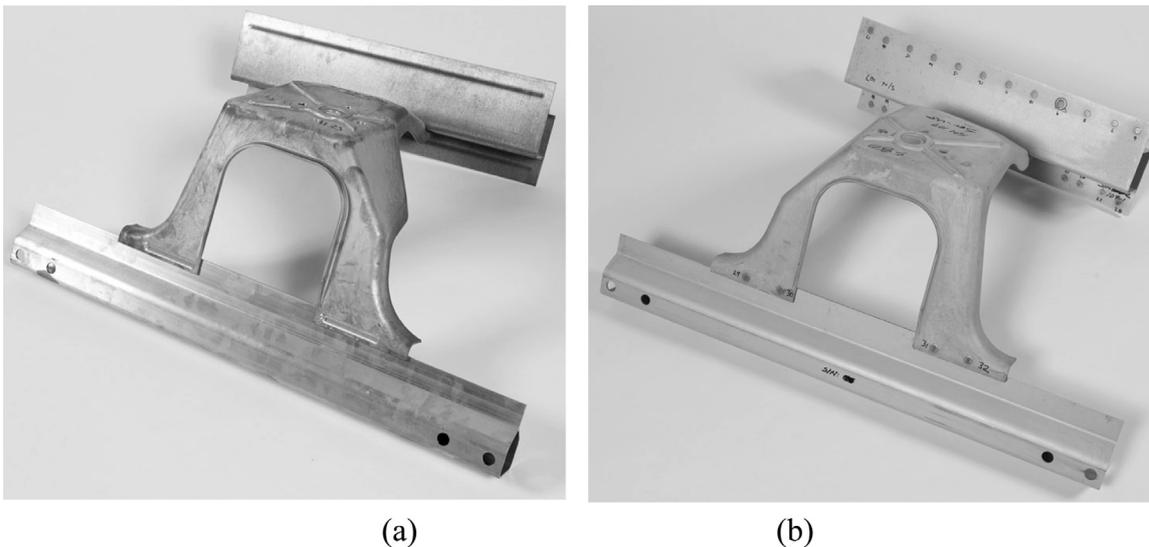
USCAR demo structure build using (a) FSLW (friction stir linear welding); and (b) LSPR (laser-assisted self-pierce rivet) joining processes [67].
